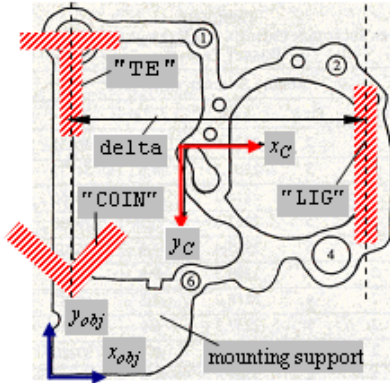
Assembling "COIN", "TE" and "LIG" isolating components (MECCANO) on a carburettor flange
